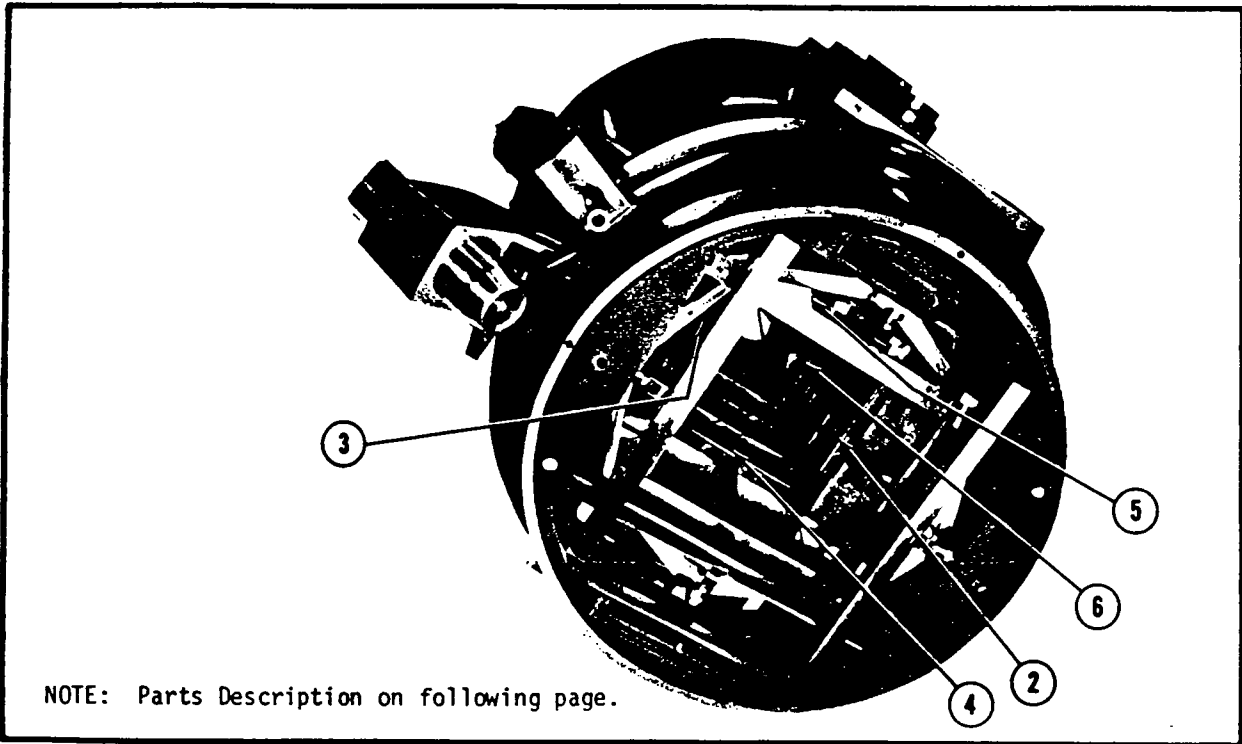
COBALT COLLIMATOR FIELD LENS ASSEMBLY
